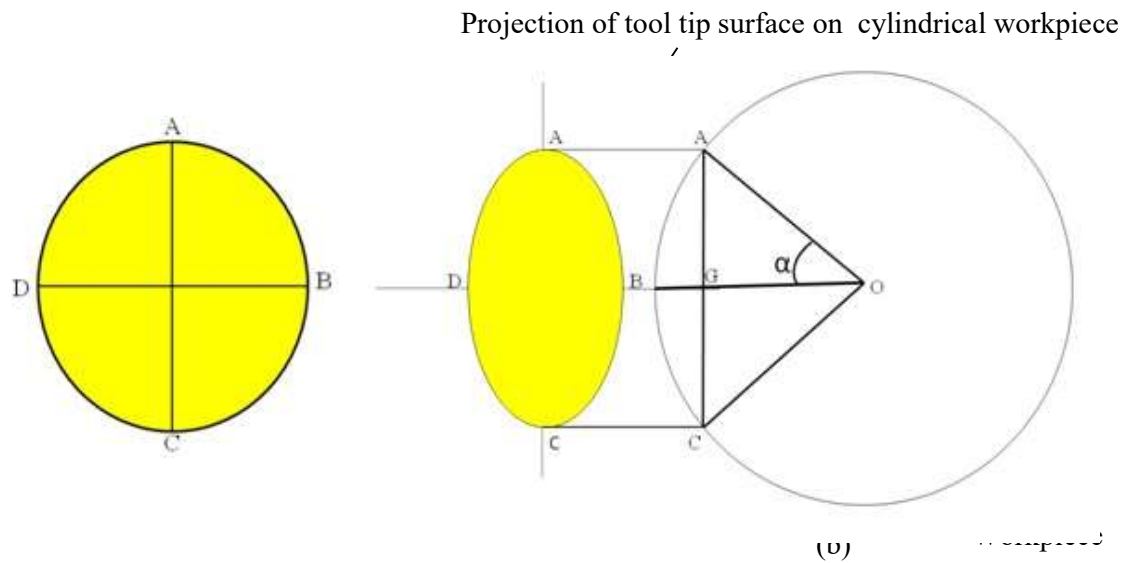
(a) The area of active abrasives over tool tip face, and (b) geometrical representation of region of active abrasives on cylindrical workpiece surface (side view)
